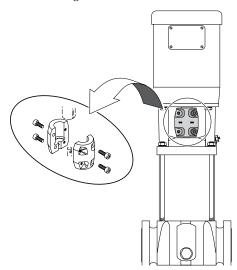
Remove the Socket Head Screws and the Coupling Halves
